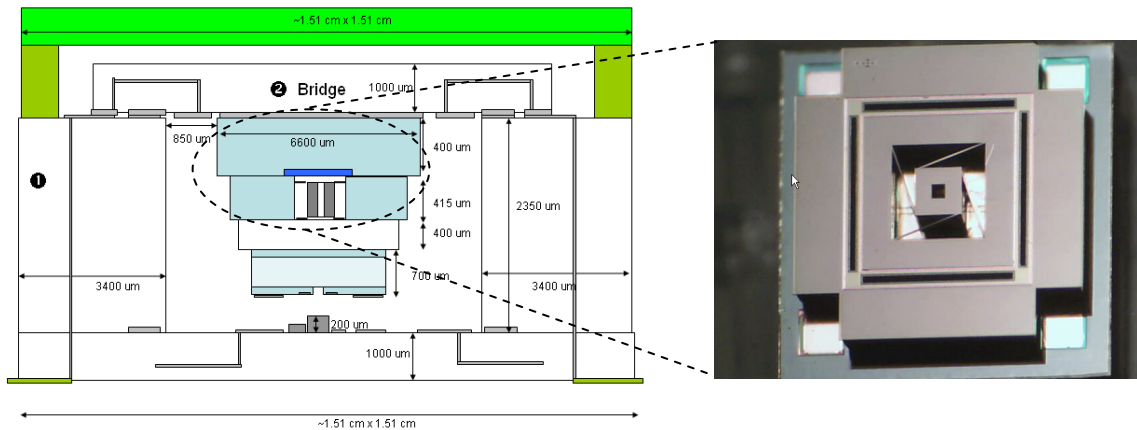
Cross-sectional drawing of the optimized package showing the laser attach on the substrate while the MEMS sensor die is attached to the lid.
